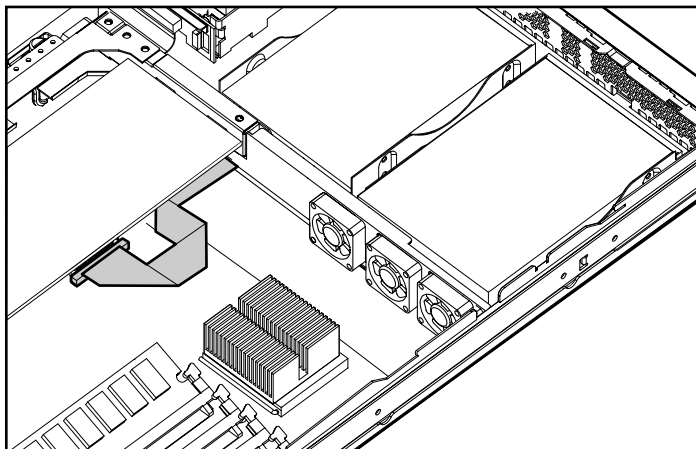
SCSI cable connected from a PCI expansion board to SCSI hard drives
